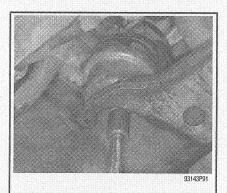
Loosen the bottom nut on the front motor mount; remove it if necessary
